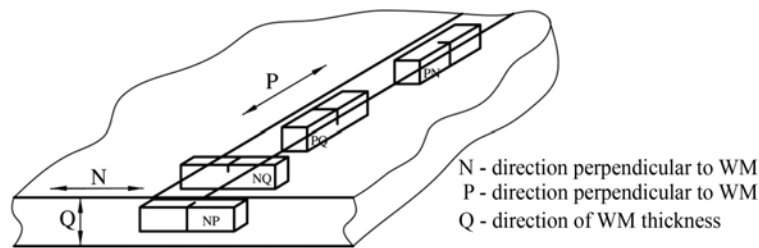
Specimen extraction method and crack position during weld metal testing
